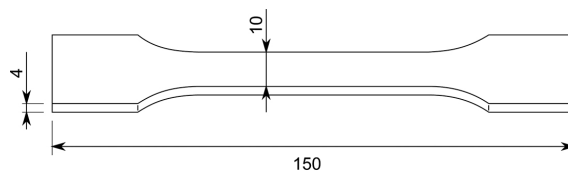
Test specimen dimensions for PBJ-parts used in investment casting.
